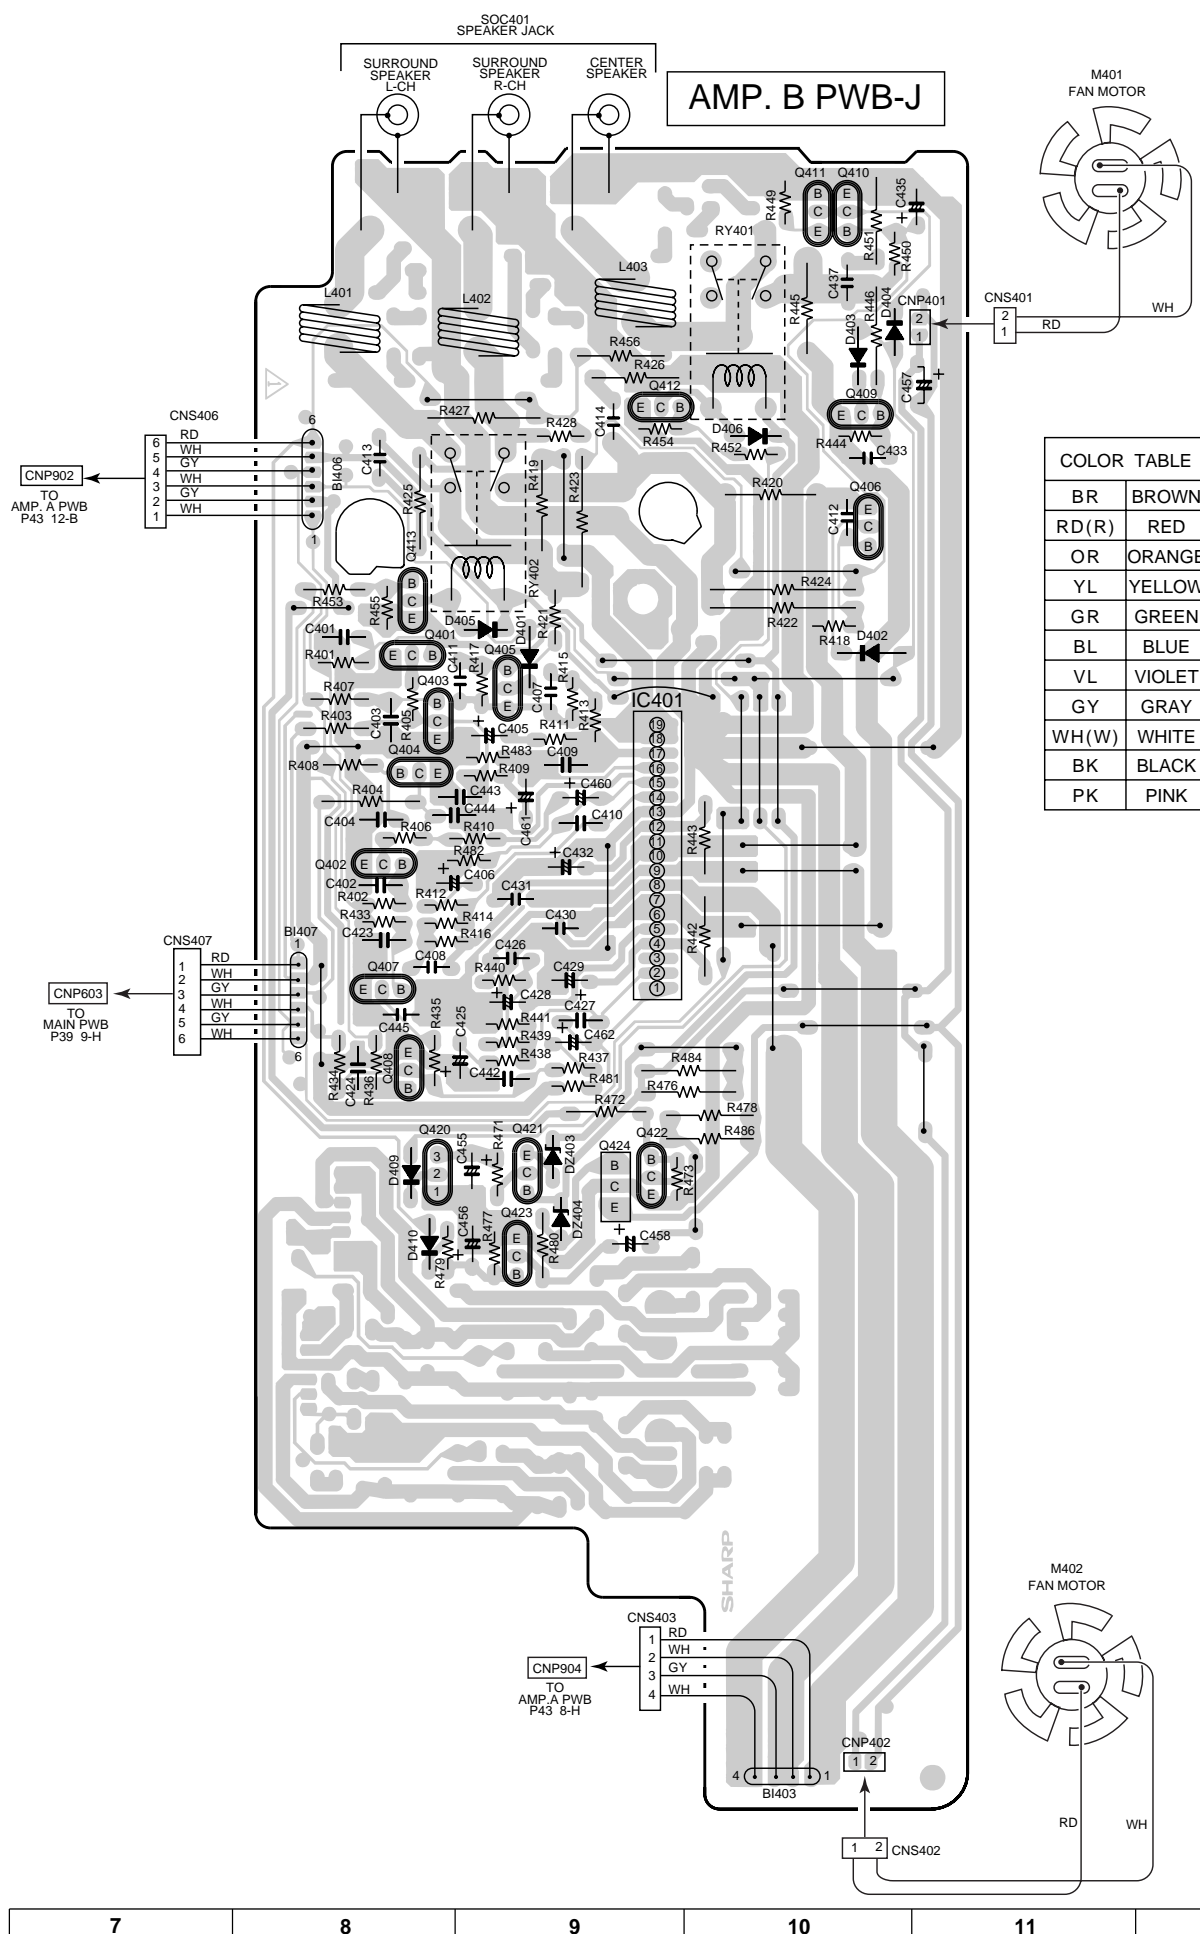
WIRING SIDE OF P.W.BOARD (8/10)
